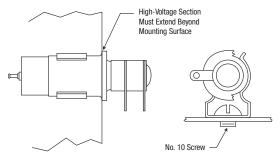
B — Flange Mounting (optional flanges are available on many relays)
